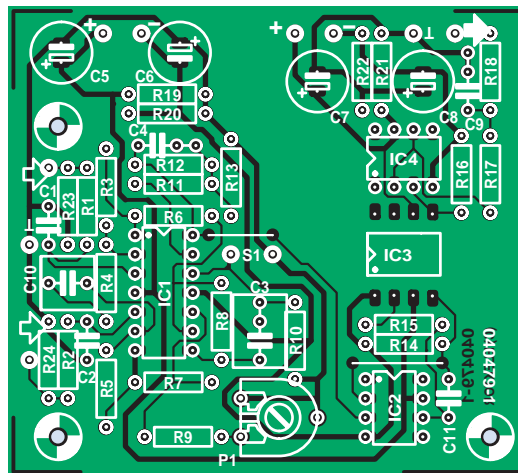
There are no SMDs on the single-sided printed circuit board, and so assembly is straightforward.
